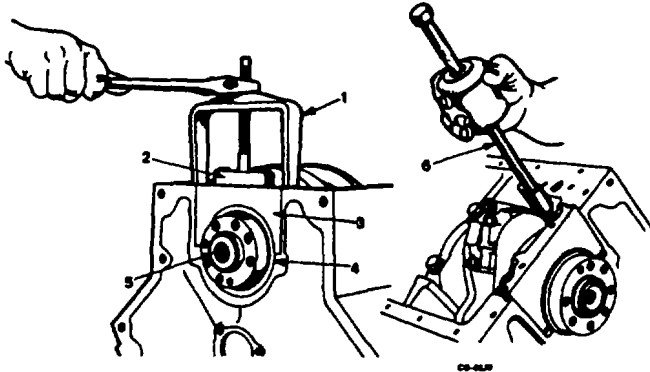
Pulley Rear Main Bearing Cap (No. 5)
